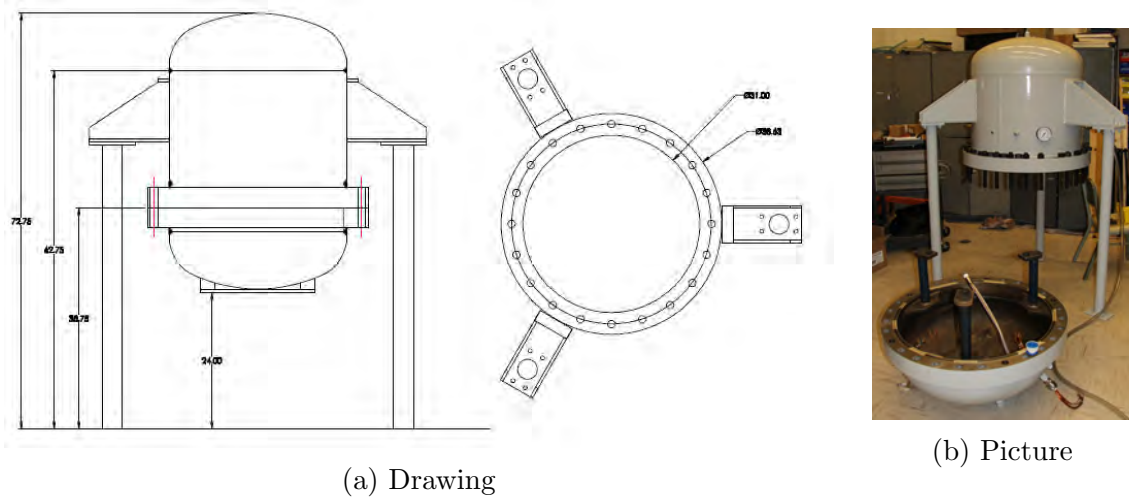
Drawing and picture of the fabricated pressure vessel.
